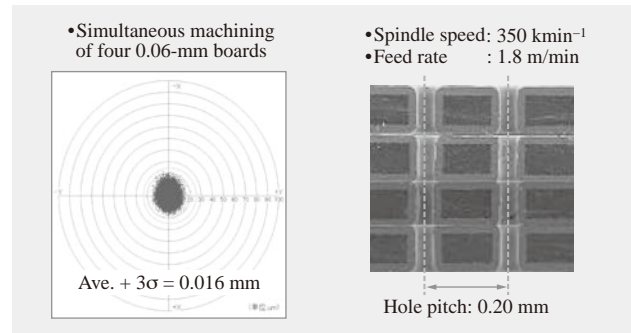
Positioning Accuracy for Drilling 0.8-mm Diameter Holes.
